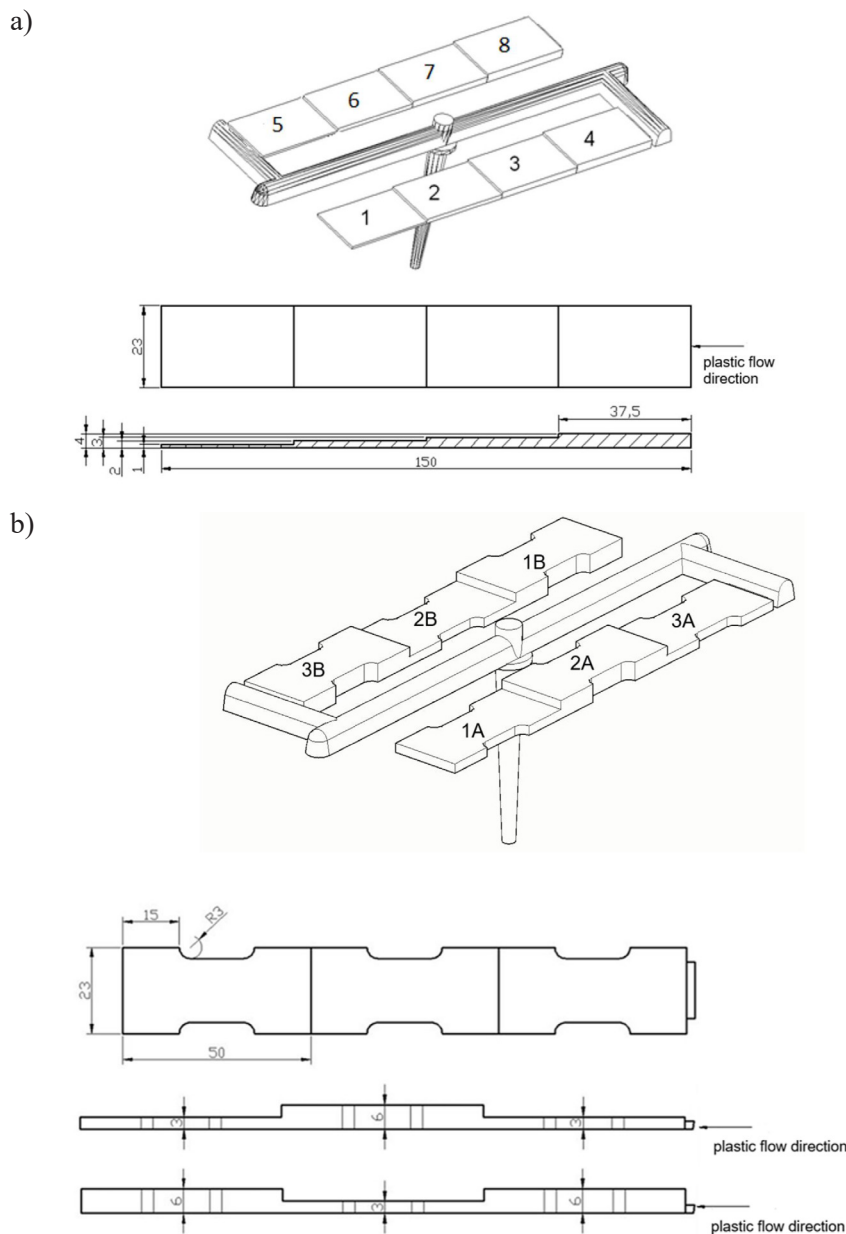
Shape and dimensions of the moulded parts used in the tests: (a) four-stage moulded part, (b) three-stage moulded part
